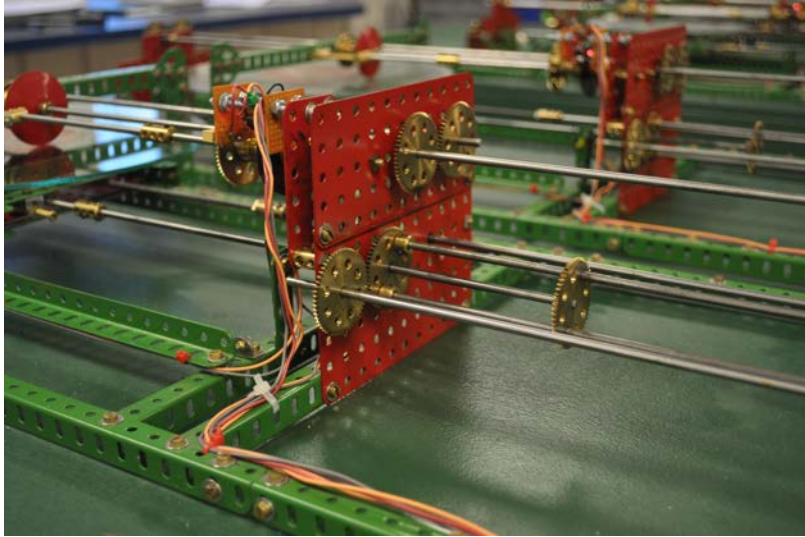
Half View of spline-shaft. The connection to the disk drive gear train and the spur gears connecting the assembly are depicted on the left.
